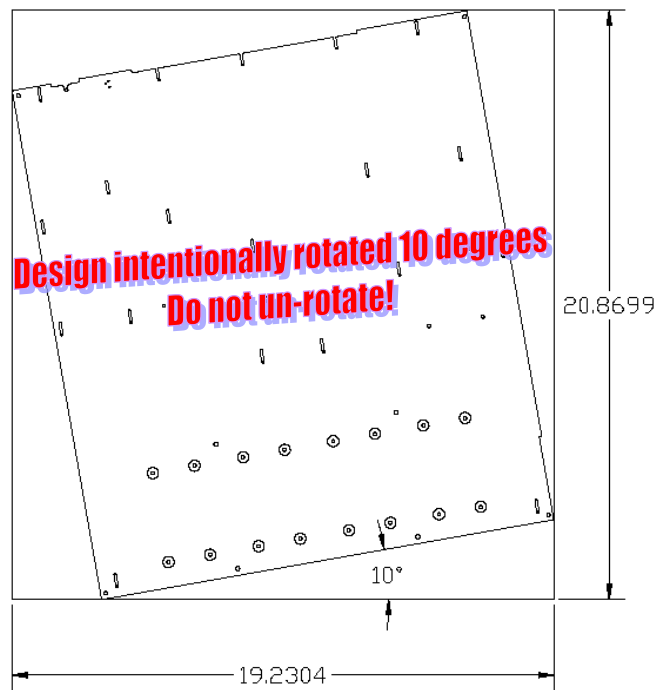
Fab Drawing Highlighting Intentional Design Rotation
